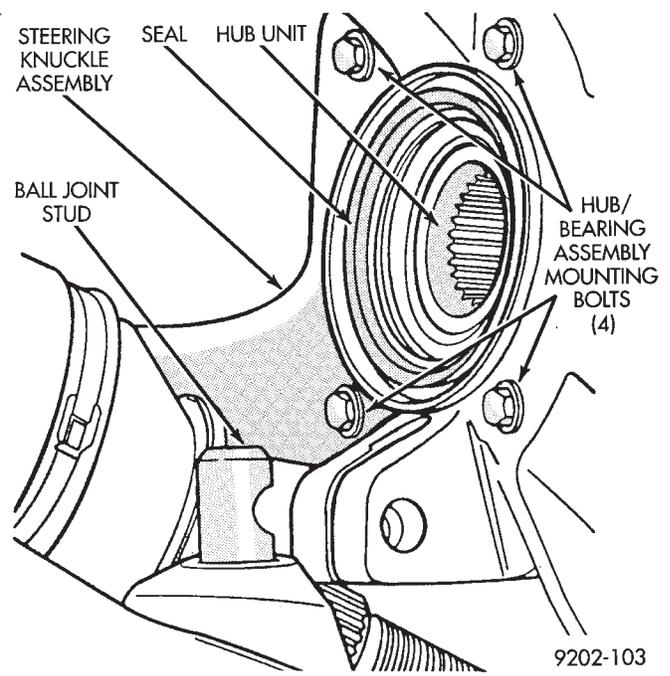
Separate Ball Joint Stud from Steering Knuckle
